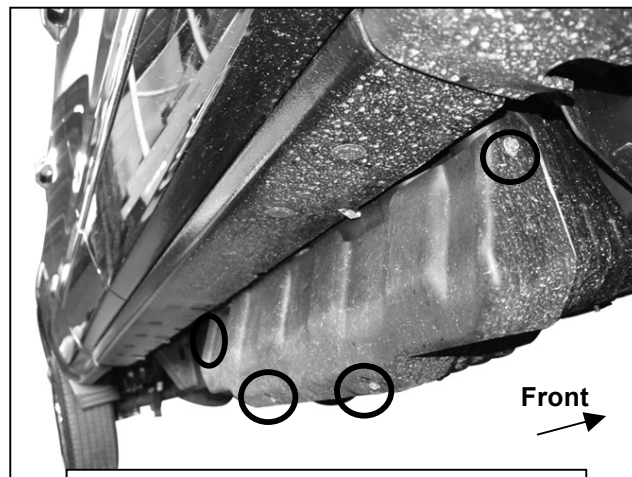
07-16 Passenger side front pictured with DEF tank cover. Remove (3) hex bolts to remove cover
